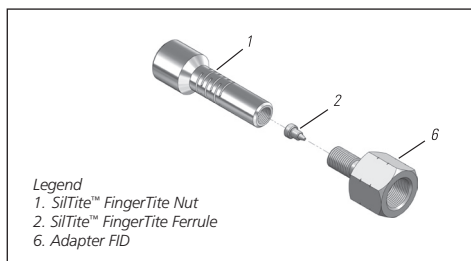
Exploded diagram of the FID SilTite™ FingerTite adapter assembly.
